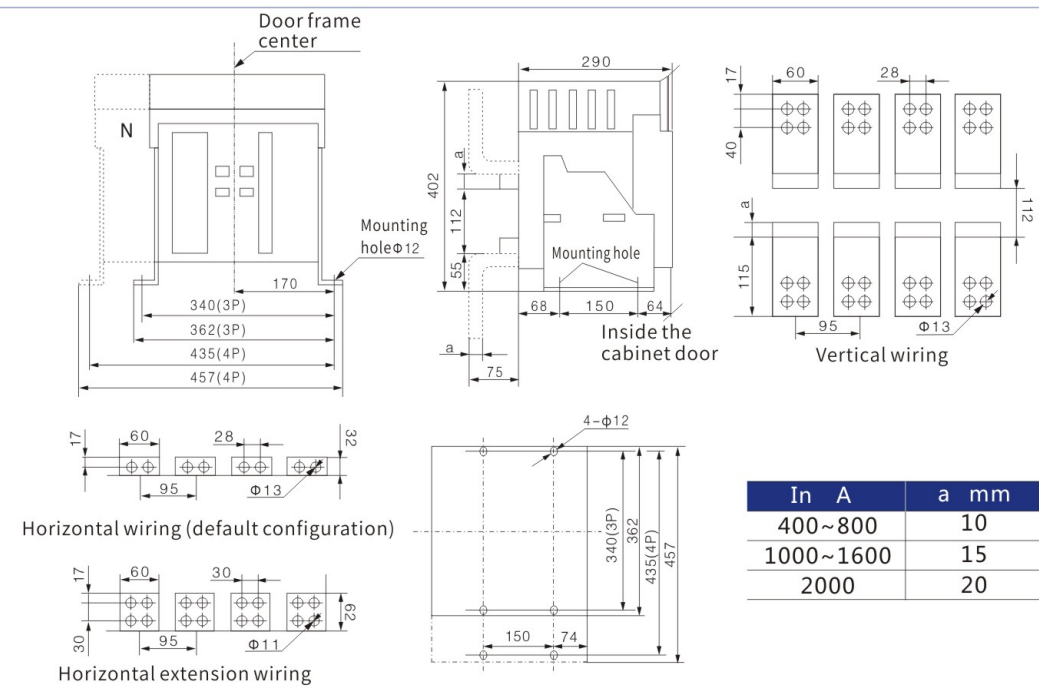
Outline and installation dimension of fixed type circuit breaker (W1-2000, 2000/4)
